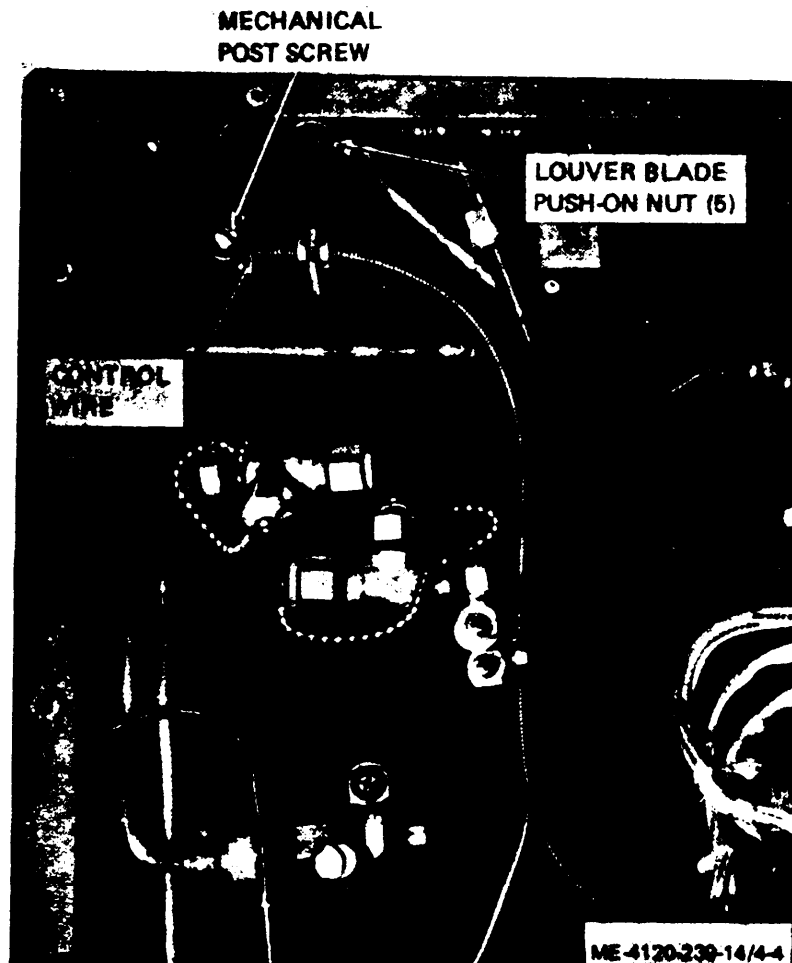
Louver blade push-on nuts and louver control attachment.
